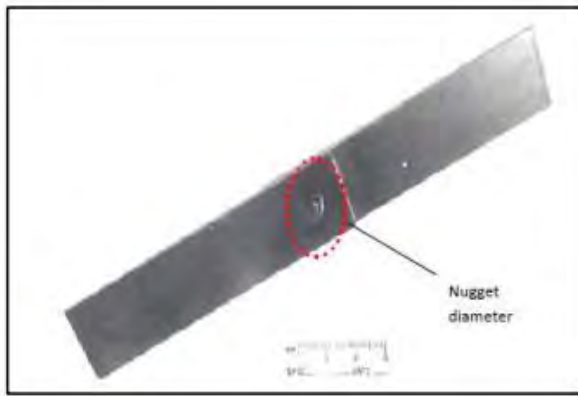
Specimen of Sheet Metal which is Lap Joints after RSW
